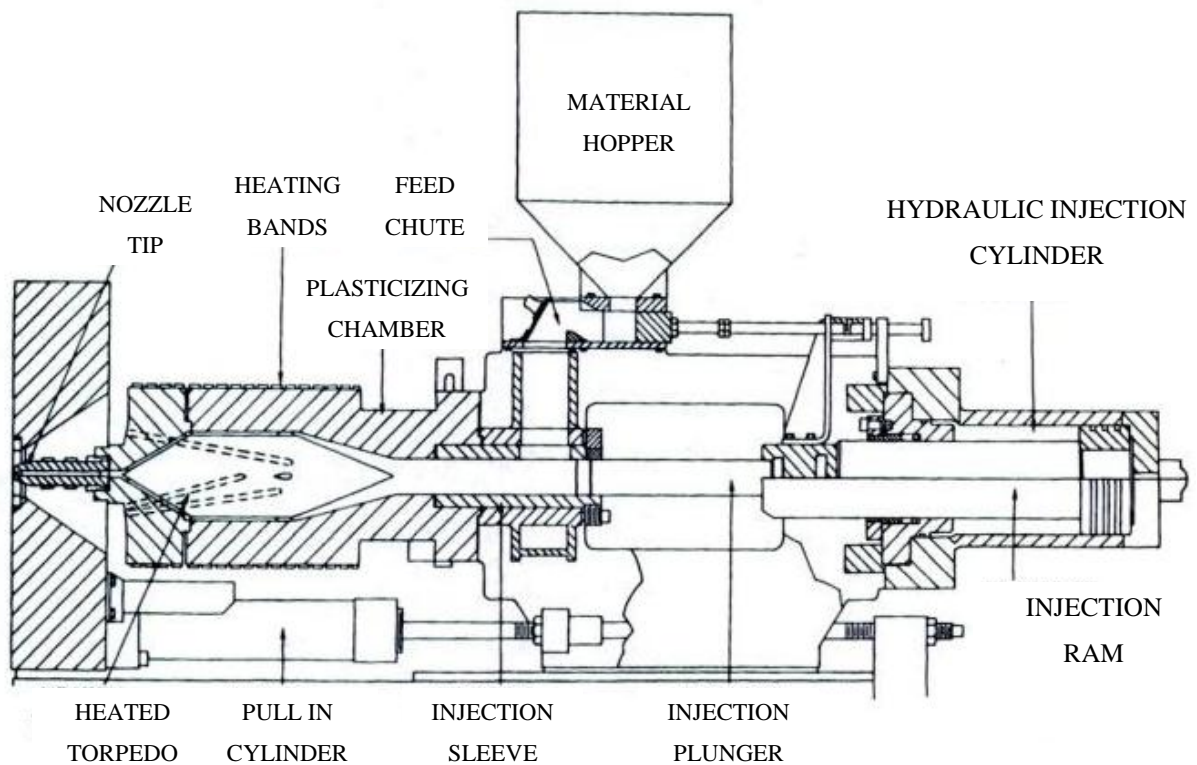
Injection end of a single-stage straight plunger injection molding machine [8]
